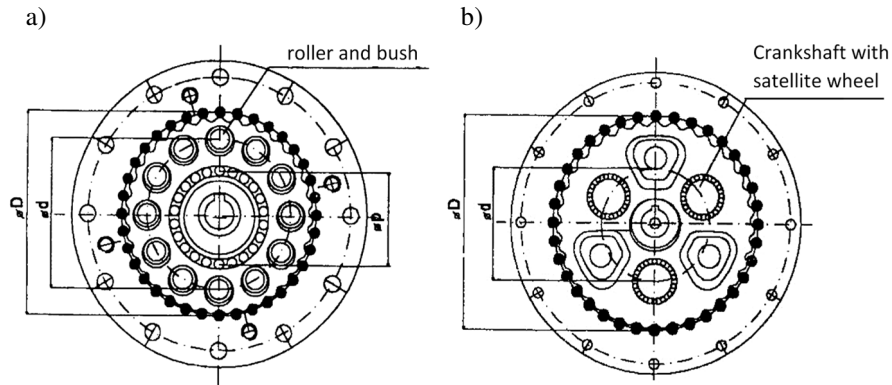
a) representation of rollers housed in bushings, wheel holes and needles on the circumference of the wheel cycloid, b) three crankshafts with satellite wheel connected via bearings with cycloidal wheels
